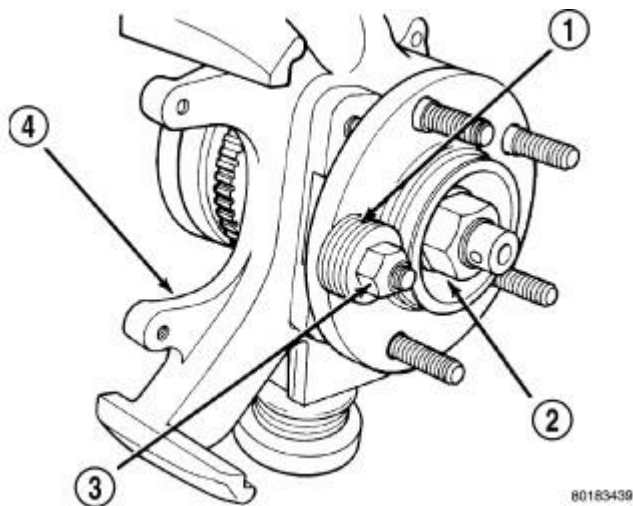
Washer, Nut, Steering Knuckle & Hub Assembly
